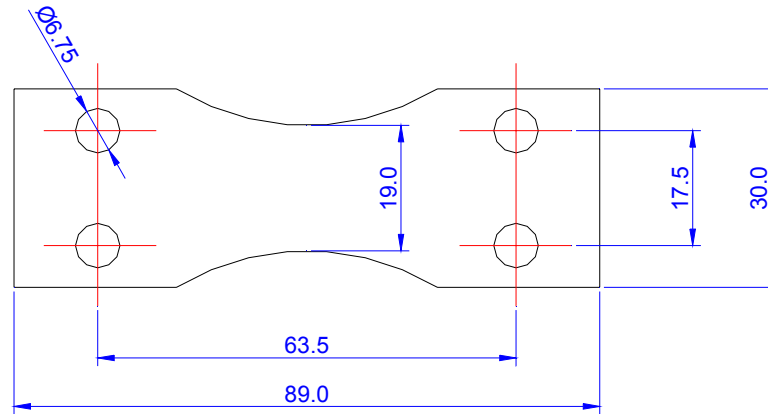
Nominal Dimensions of Dogbone Fatigue Specimens (in mm)
